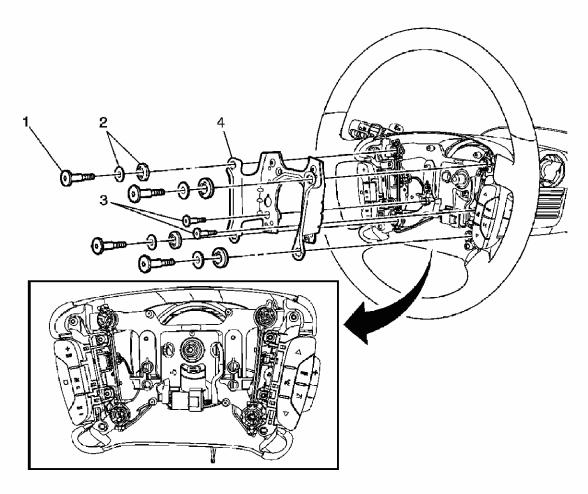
Removing/Installing Horn Switch Courtesy of GENERAL MOTORS CORP.
